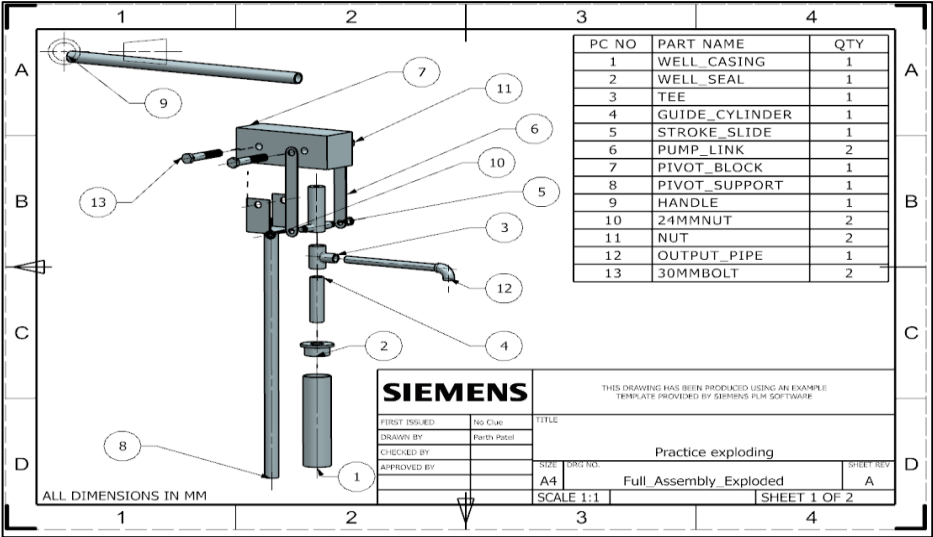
Hand Pump Exploded View (2<sup>nd</sup> Year Lab Assignment)
